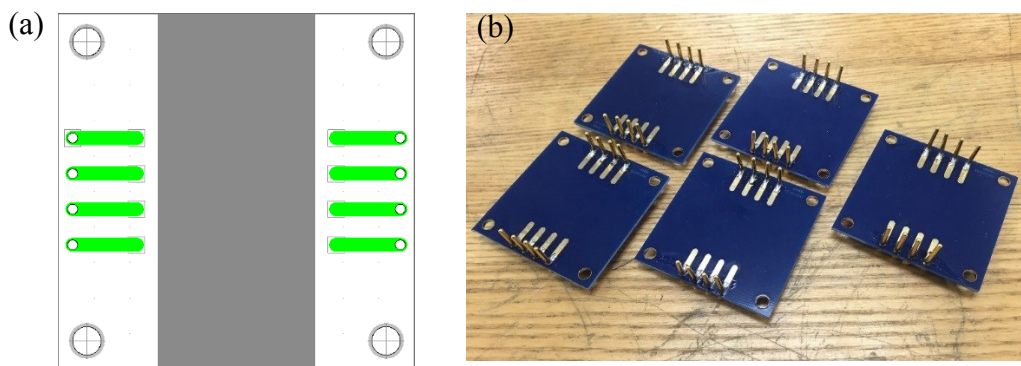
(a) circuit board design and (b) photo of a complete PCB product
